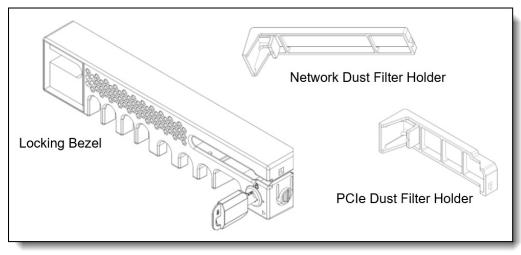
Locking Bezel and Filter Holders (4M17A37599)
